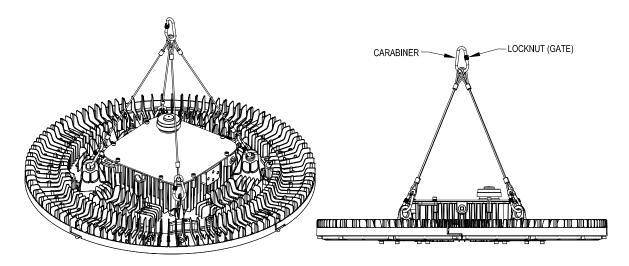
MOUNTING OPTIONS - CABLE MOUNTING
